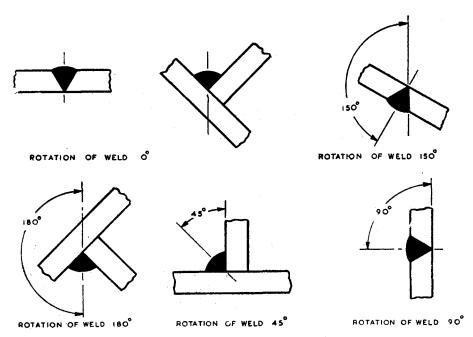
DIAGRAMS TO ILLUSTRATE WELD ROTATION
